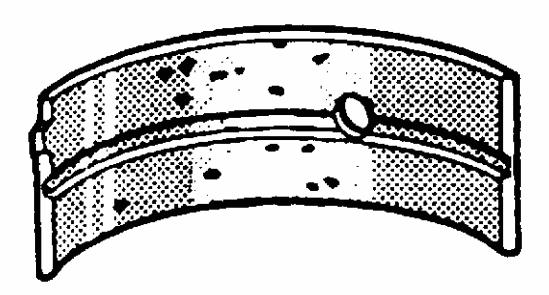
Identifying Crankshaft Bearing Craters Or Pockets Courtesy of GENERAL MOTORS CORP.
